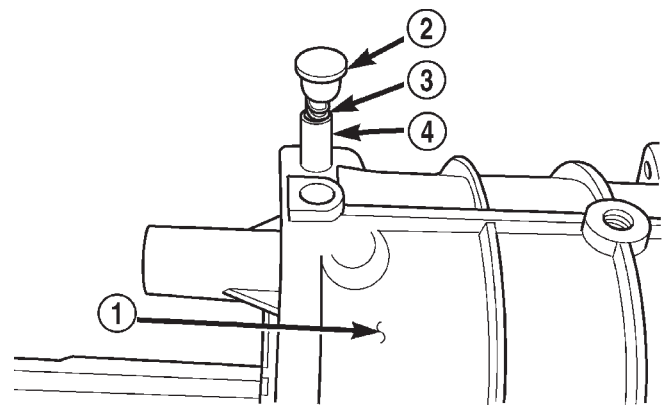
SHIFT SHAFT BUSHING LOCK BOLT
